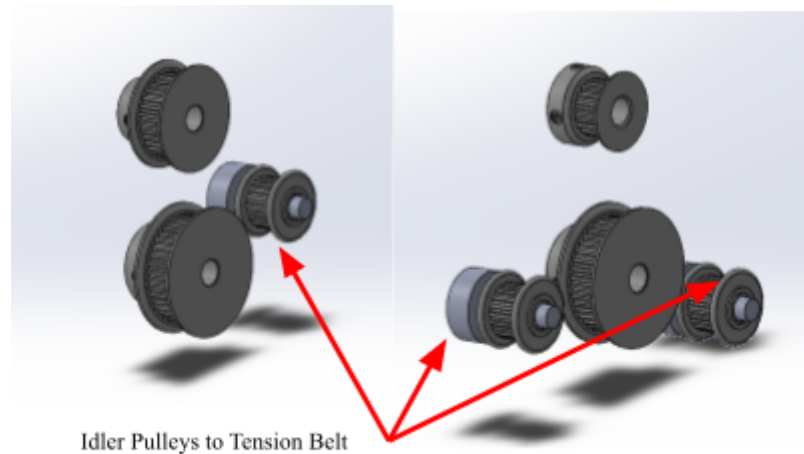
The front rotor pulley assembly (left) and the back rotor pulley assembly (right) including the idler pulleys with adjustable position.
